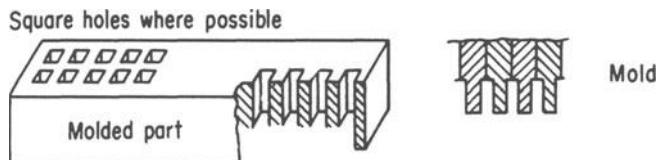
Whenever possible with close-tolerance parts, consider the potential of using a laminated type of mold.
